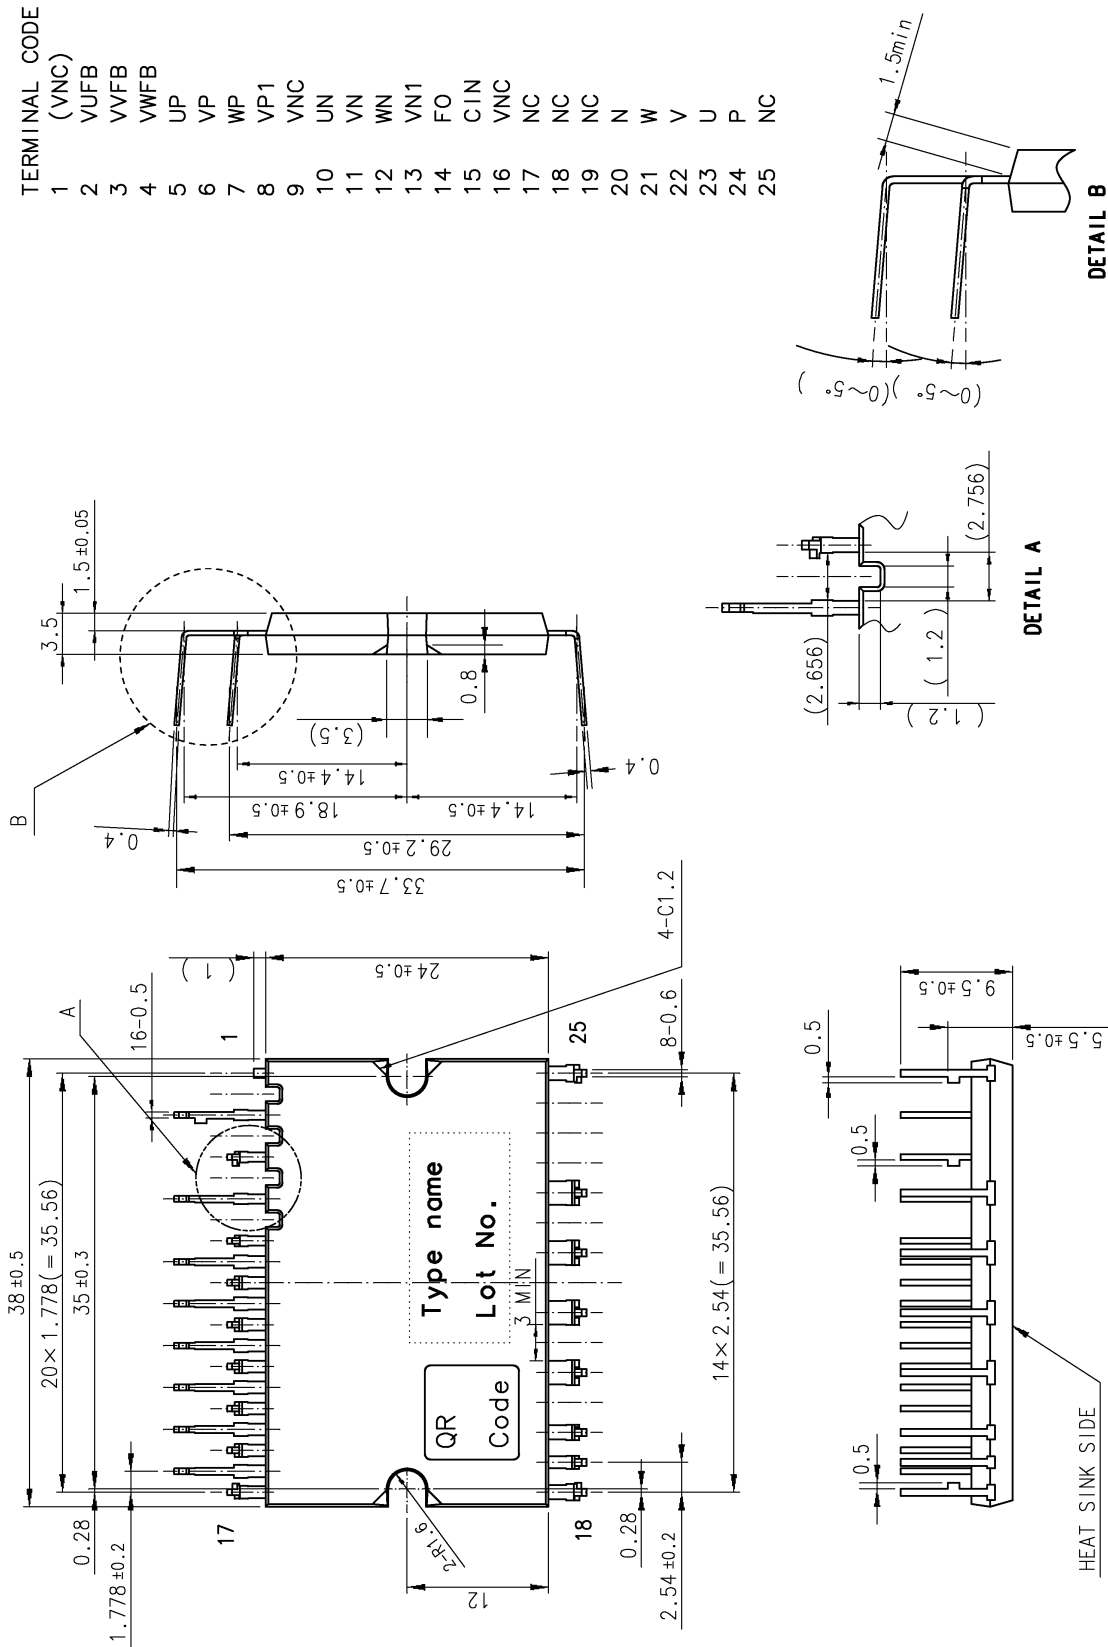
Zigzag pin type package(-4C/-CT) outline drawing
